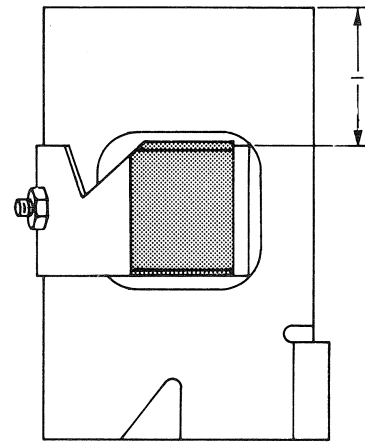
HEAT FILTER ADAPTER TOOL G13-38000
